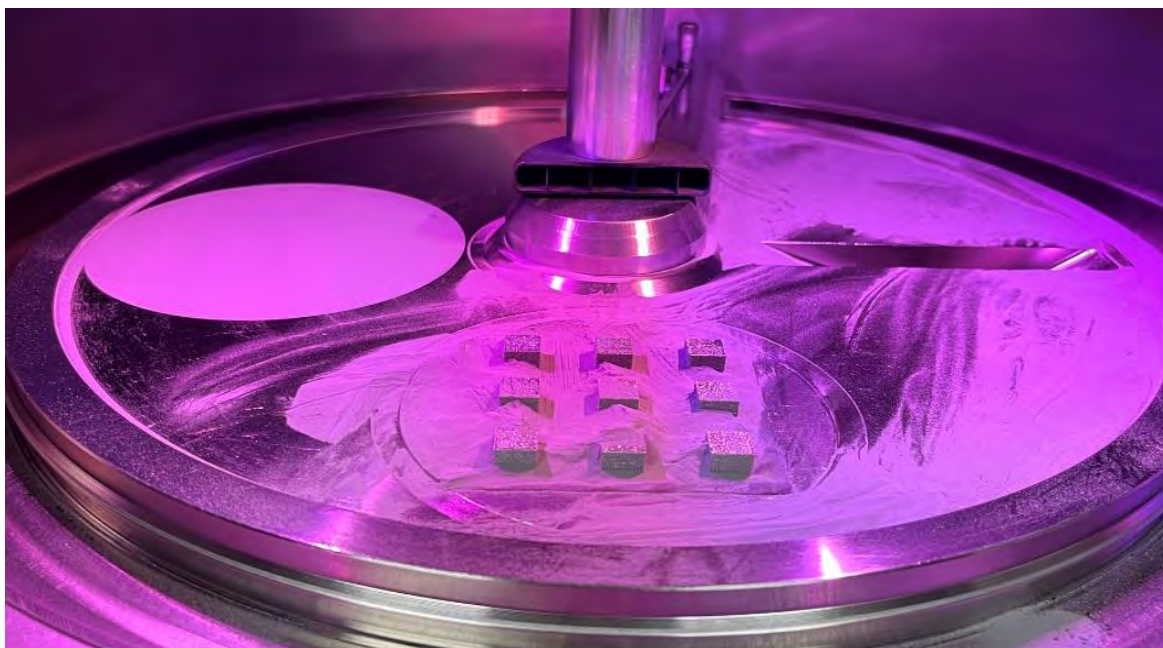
a completed print cycle before removal of the samples from the LBPBF machine.
